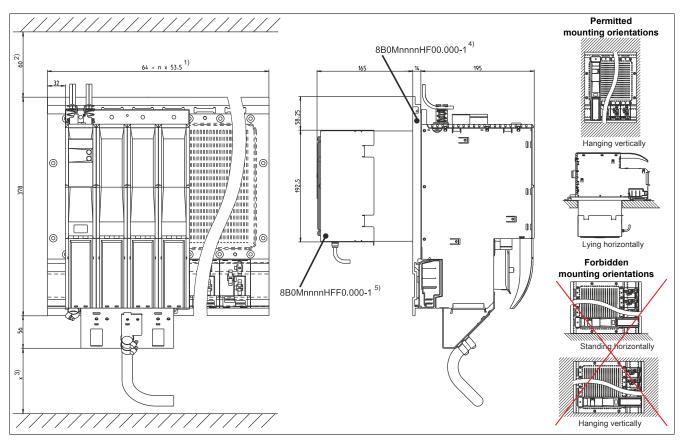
Dimension diagram and installation dimensions - Feed-through mounting
